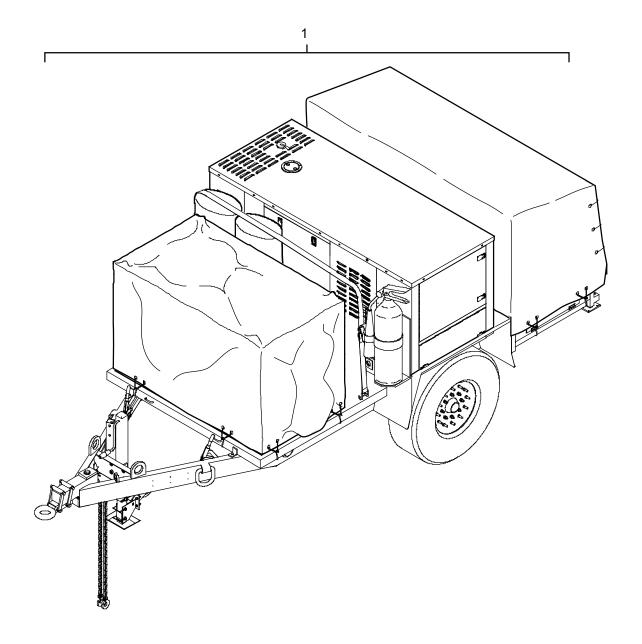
HP-2C/185 UST Trailer (Sheet 1 of 3).
